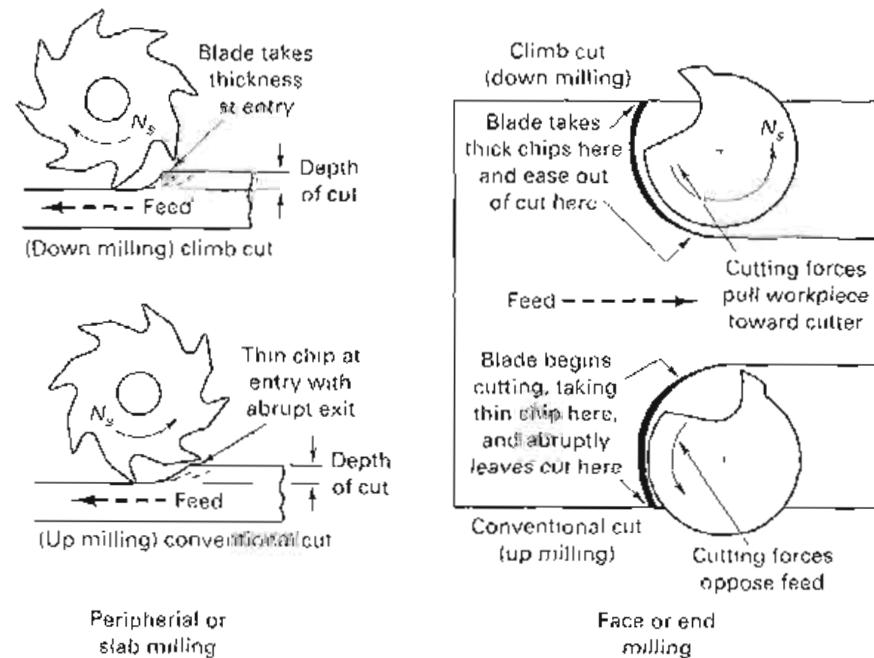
Climb cut or down milling versus conventional cut or up milling for slab or face or end milling
